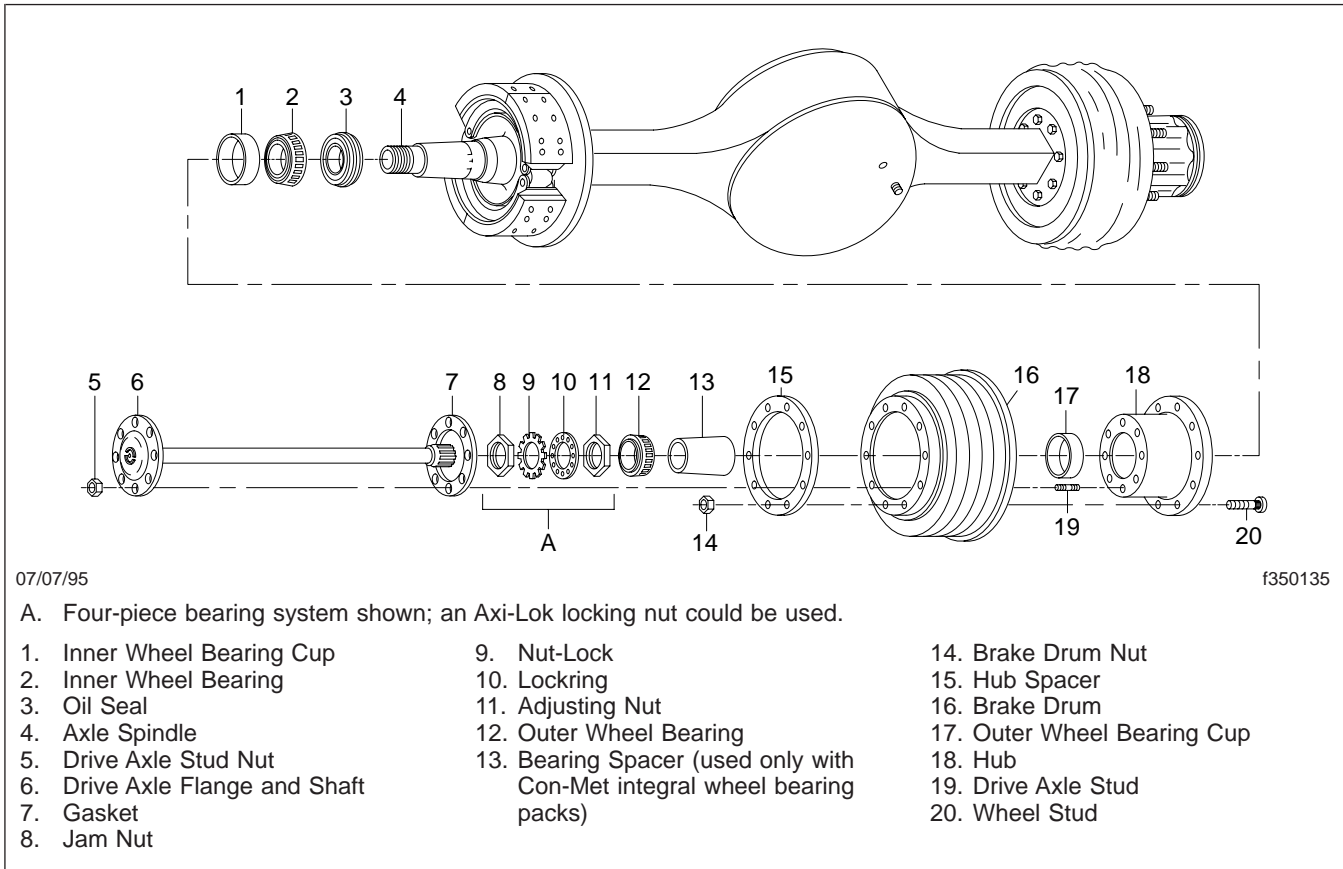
, Typical Drive Axle and Hub Assembly (exploded view)
